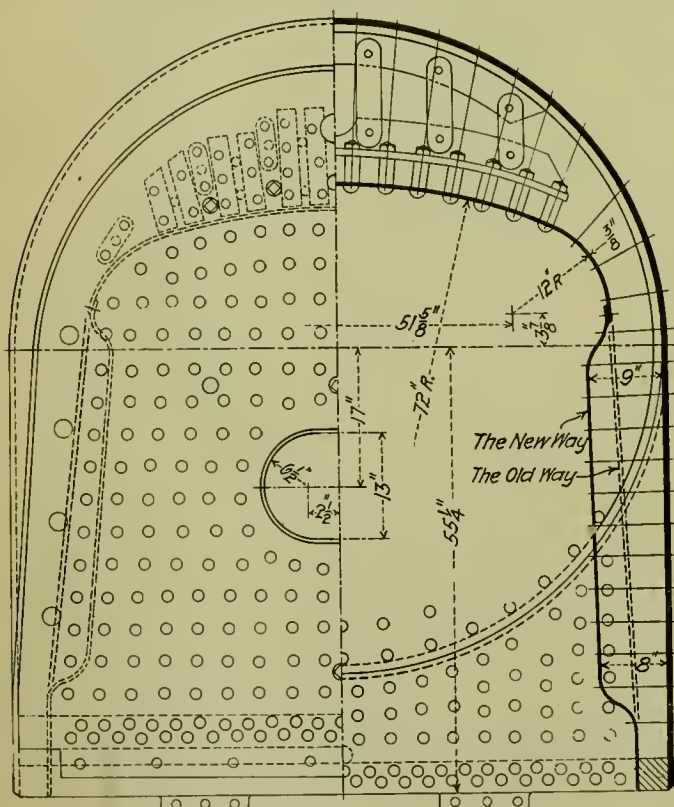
SMYTHE'S OFFSET SIDE SHEETS.
